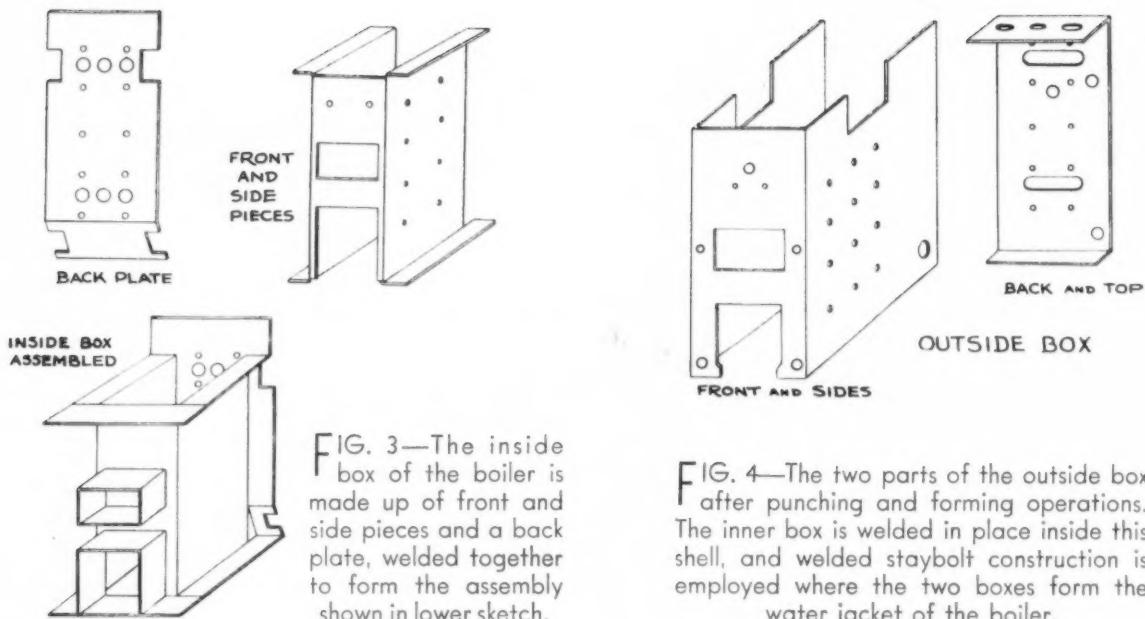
The inside box of the boiler is made up of front and side pieces and a back plate, welded together to form the assembly shown in lower sketch.
